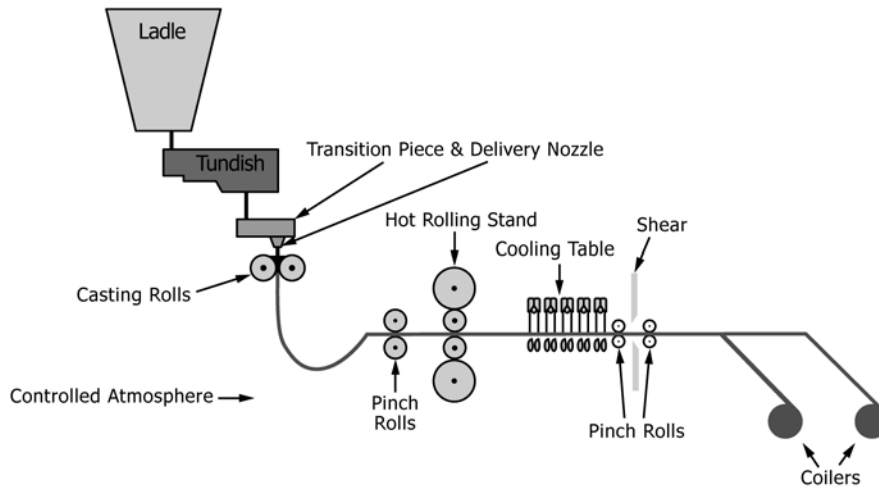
Layout of Twin-roll Casting Machine Showing In-line Hot Rolling Mill
